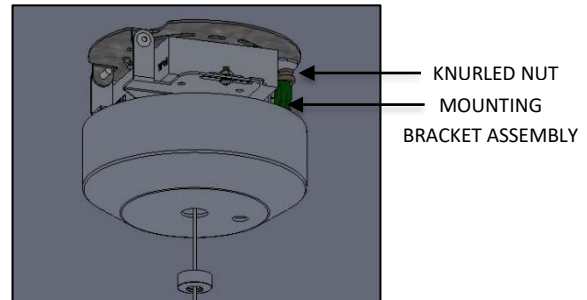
MOUNTING BRACKET ASSEMBLY
